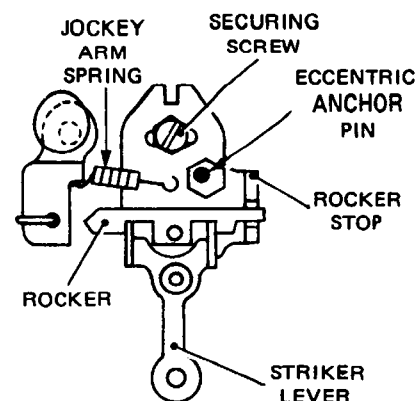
ROCKER STOP PLATE (REAR VIEW)
